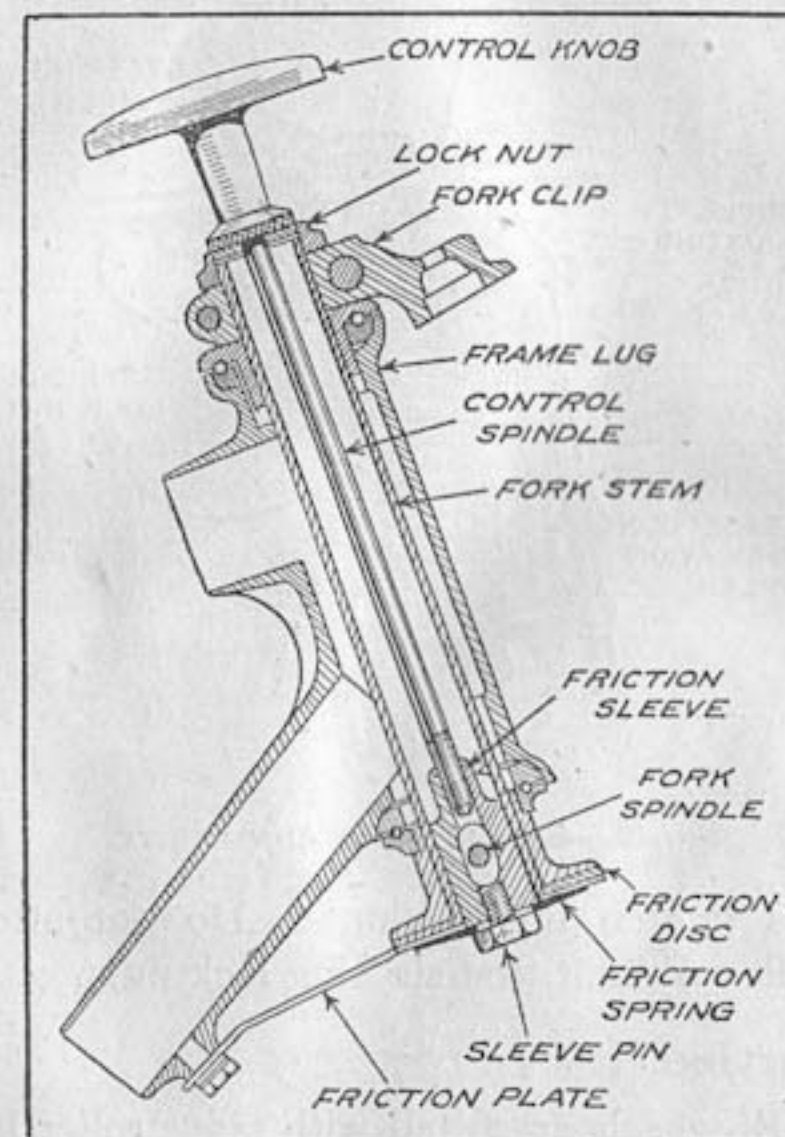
STEERING DAMPER ARRANGEMENT.
